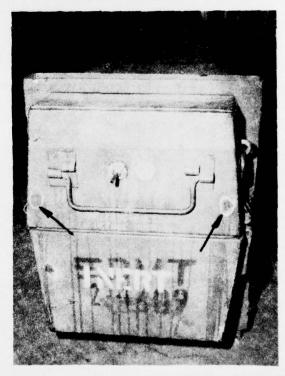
LEAKS AT SPOT WELDS, FRONT END
